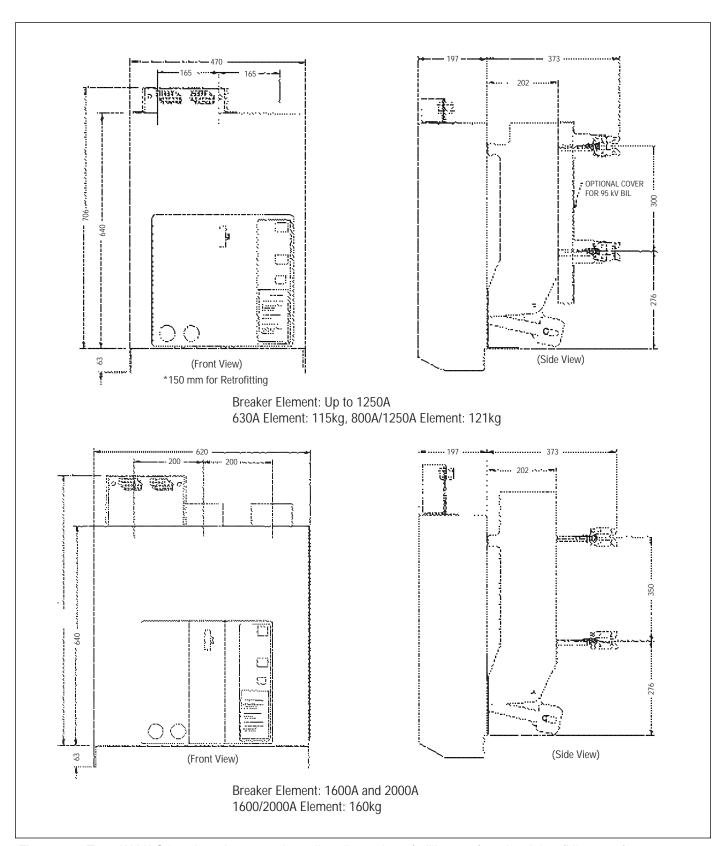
Type W-VAC breaker element only outline dimensions (millimeters) and weights (kilograms).
